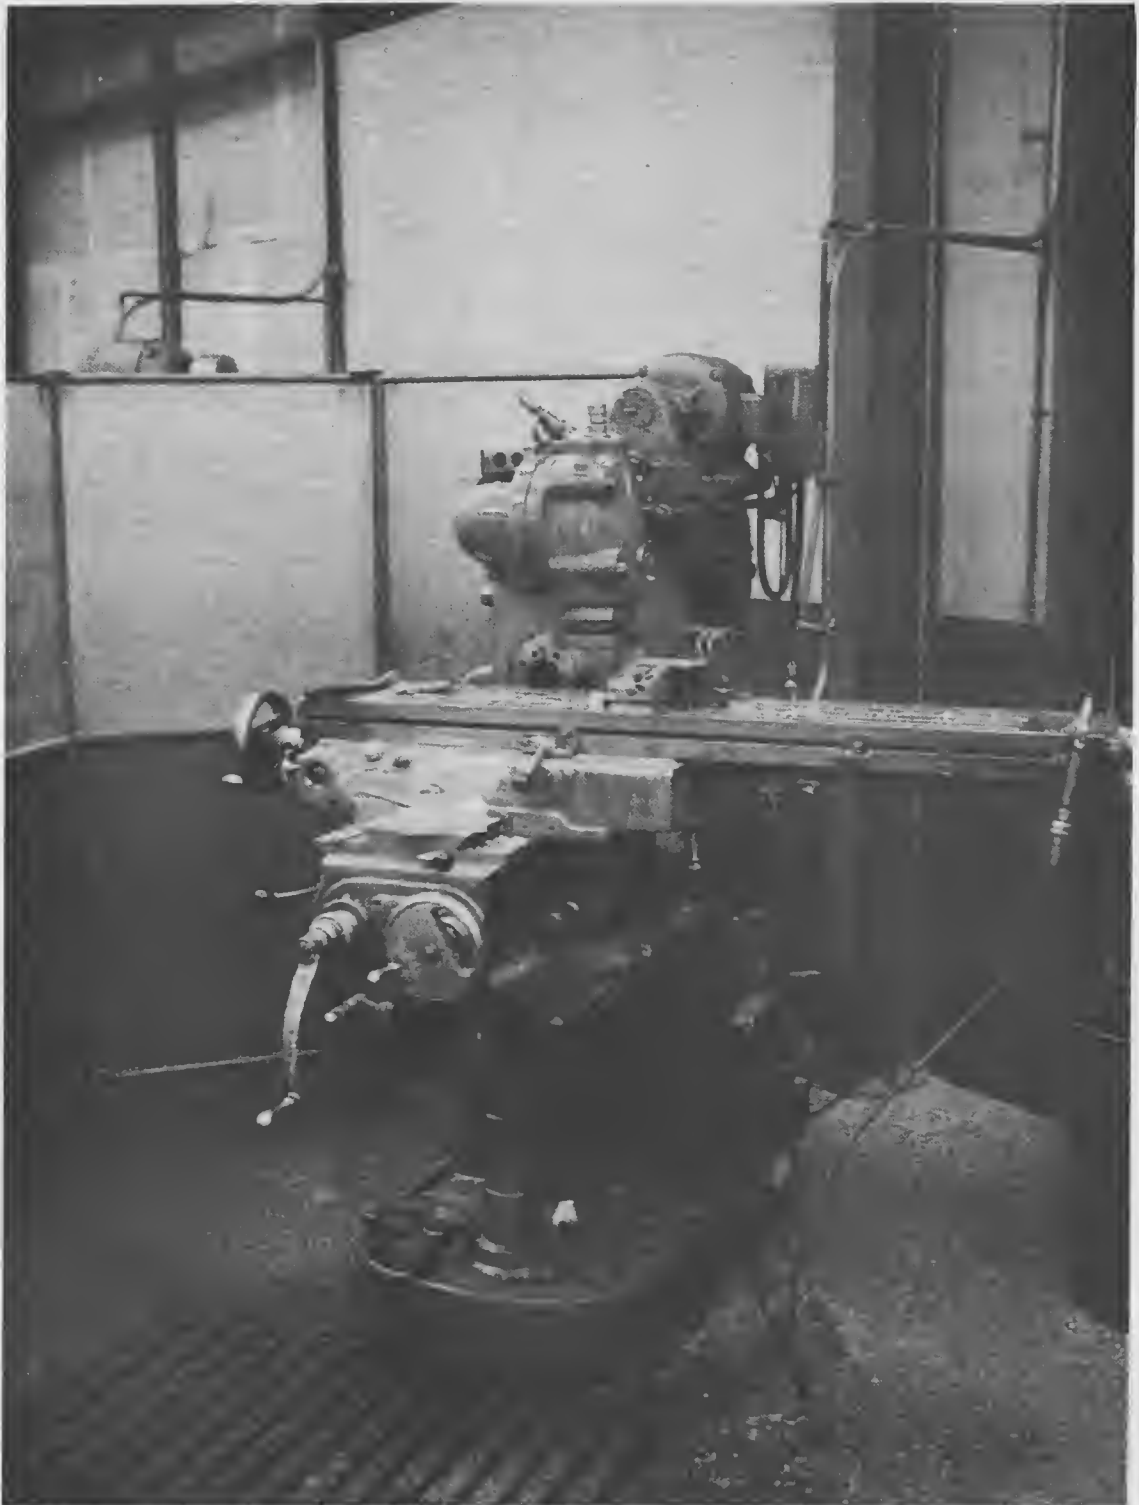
VERTICAL MILLING MACHINE SHOWN MILLING
